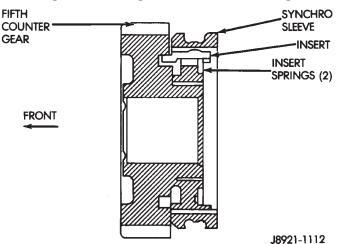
Assembling Fifth Gear And Synchro Assem-
